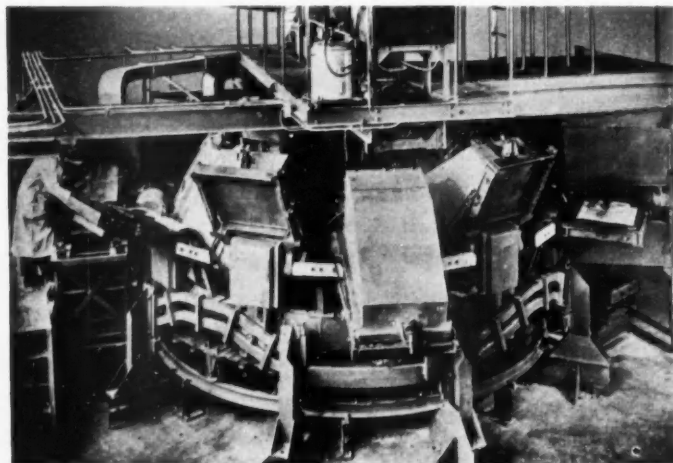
A single workman attends the machine, which rotates counterclockwise through mold forming, curing, and to finished mold delivery at the left.
